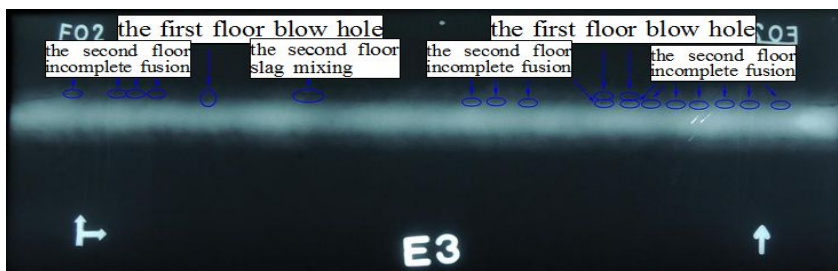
X-ray radiographic test film of shielding gas CO<sub>2</sub> 30% + Ar 70% welding specimen
